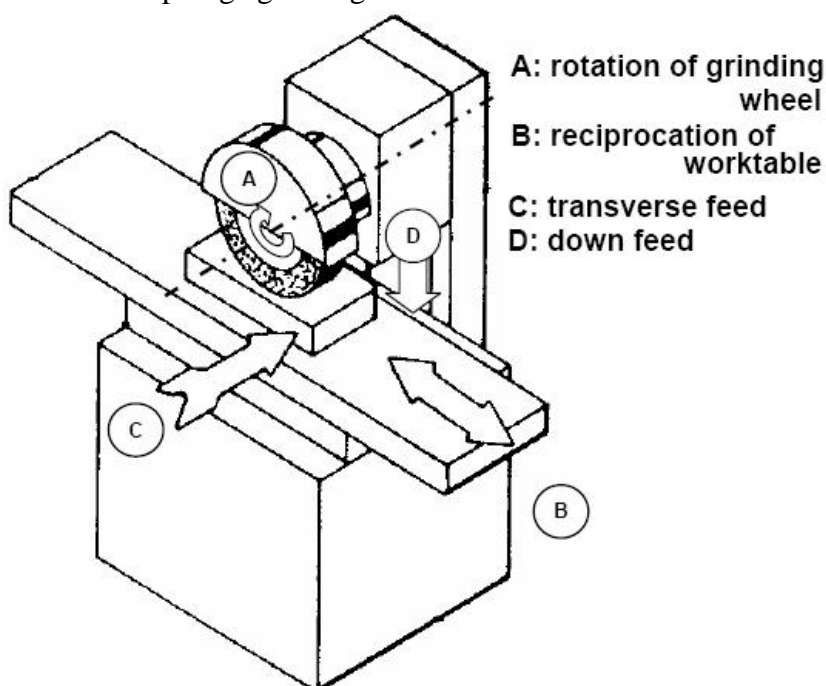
Horizontal spindle and reciprocating table grinding machine
